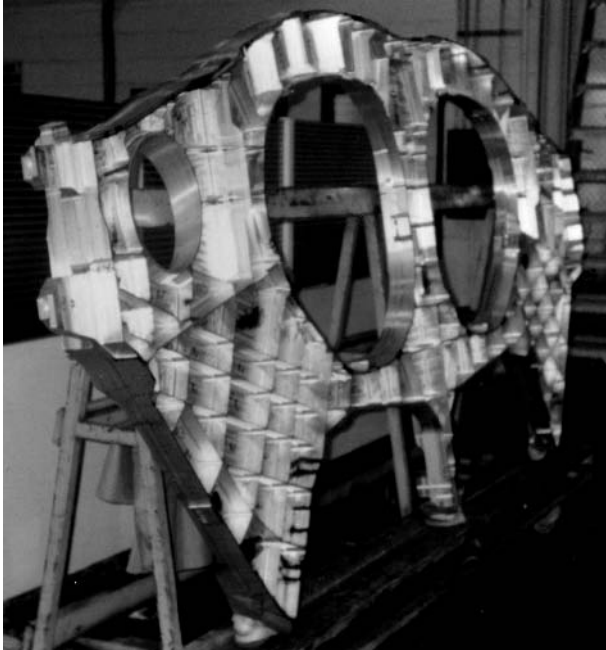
Bulkhead for a twin engine military aircraft machined from a large forging such as the one shown in Fig. 3.22 (courtesy R. G. Broadwell, Wyman Gordon)
